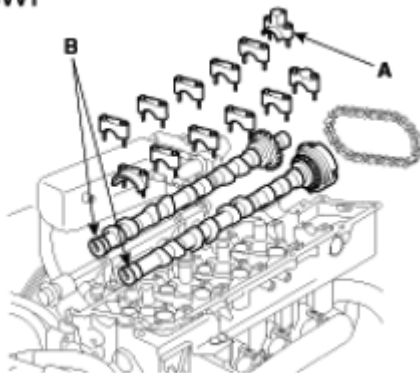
Identifying Camshaft Bearing Caps And Camshafts
